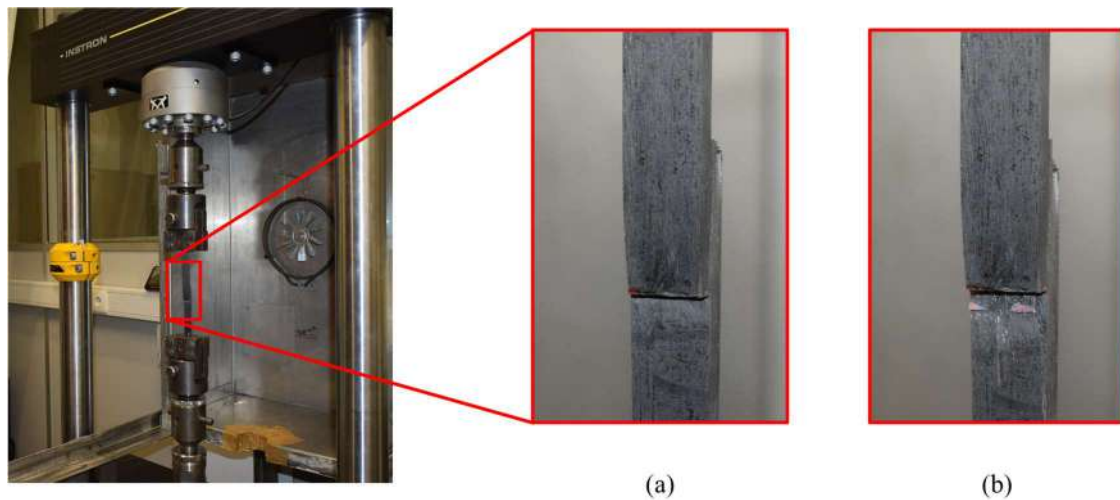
(a) Intact, (b) failed specimen in servo hydraulic testing machine.
